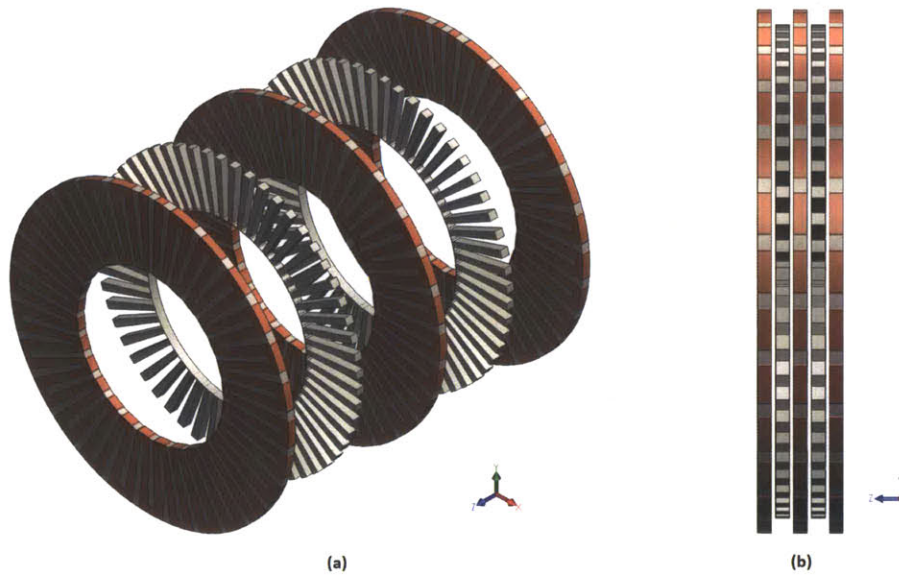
3D drawing of the magnetic elements of SVRM, showing three stator plates and two rotor plates. Air gaps are not drawn to scale for illustration purposes. (a) isometric view (b) x-axis view.
